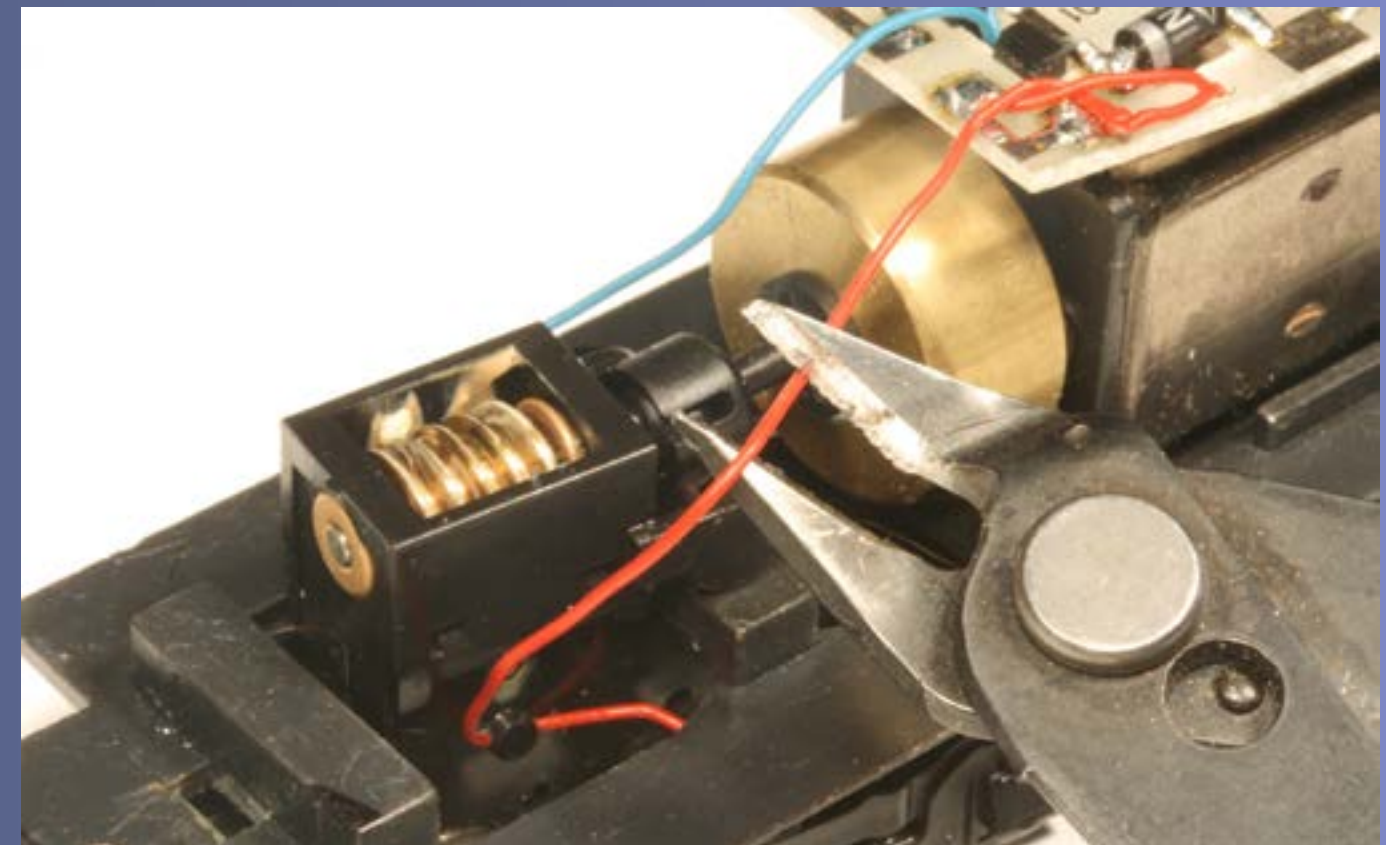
Two wires between each truck and the motor carry the electricity picked up from the rails to the motor. Once these wires are cut the motor will be electrically isolated and inoperable.
